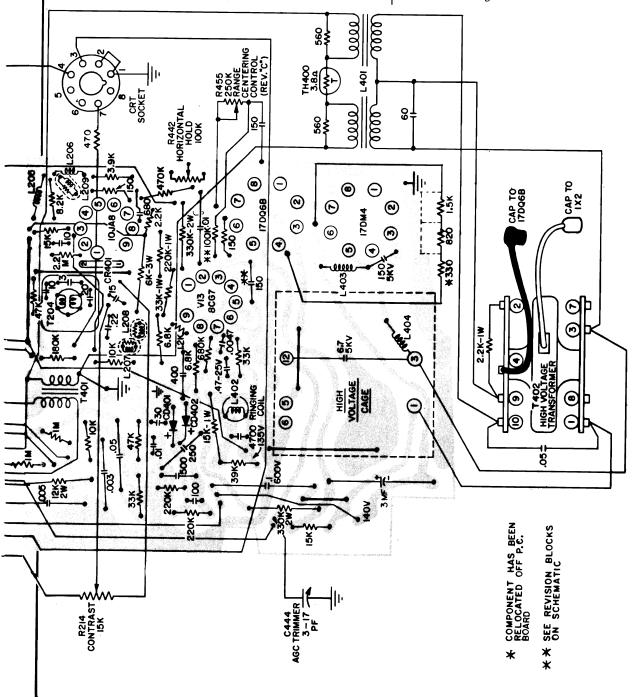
Bottom View of PC Board, showing top components in schematic form, and all external connections.
